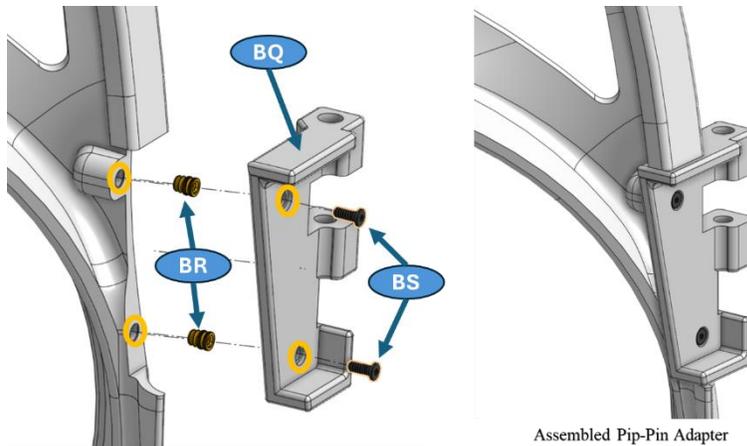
HUT Pip-pin Adapter Assembly. Right adapter shown as example.
